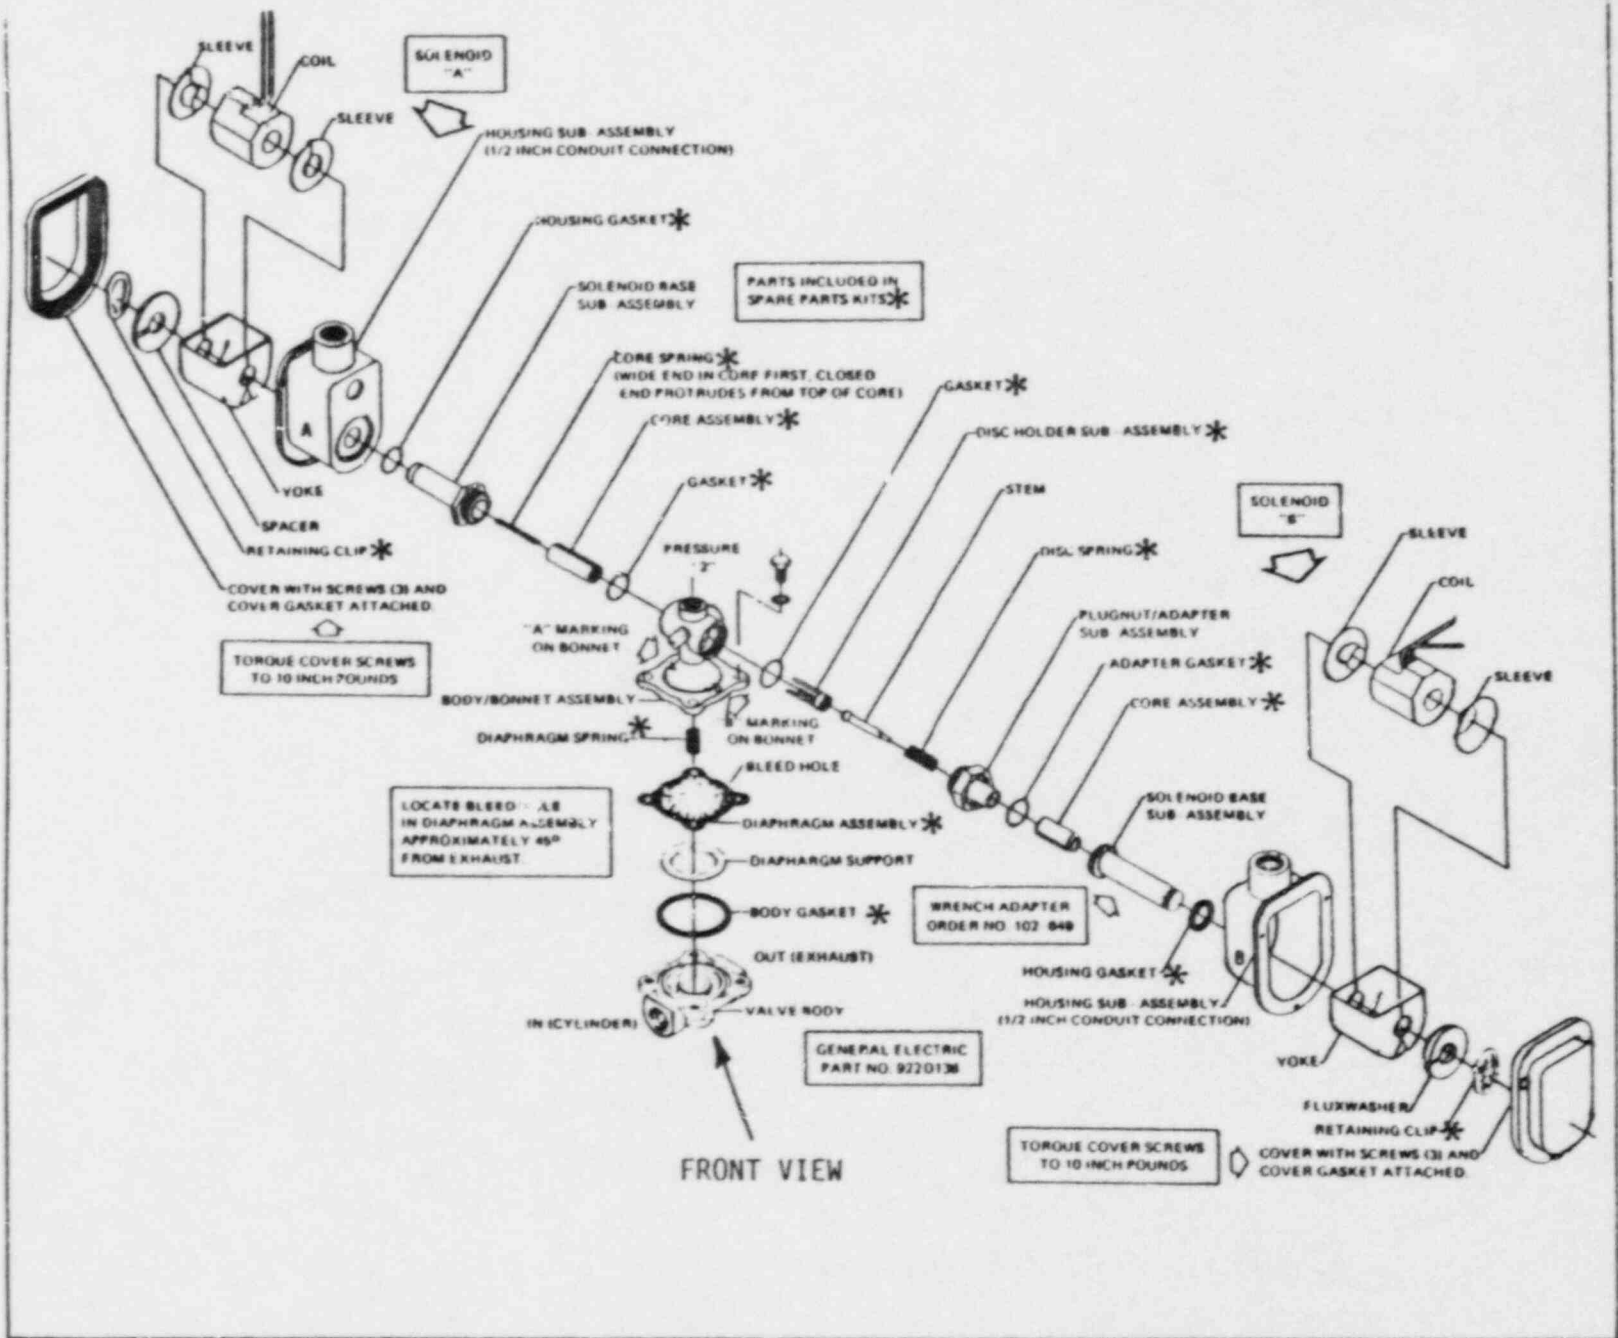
Scram Pilot Air Valve (139) - Exploded View
